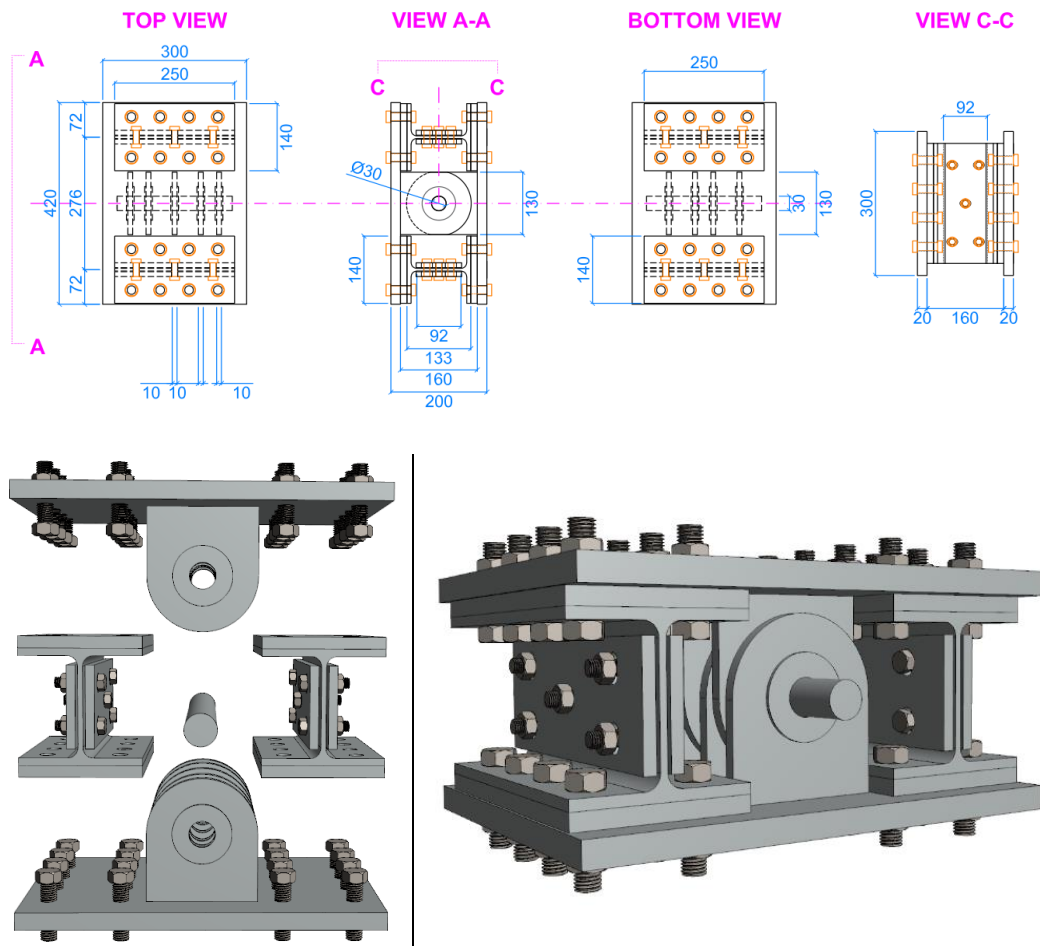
2D and 3D drawings of PT4. Dimension in mm.
